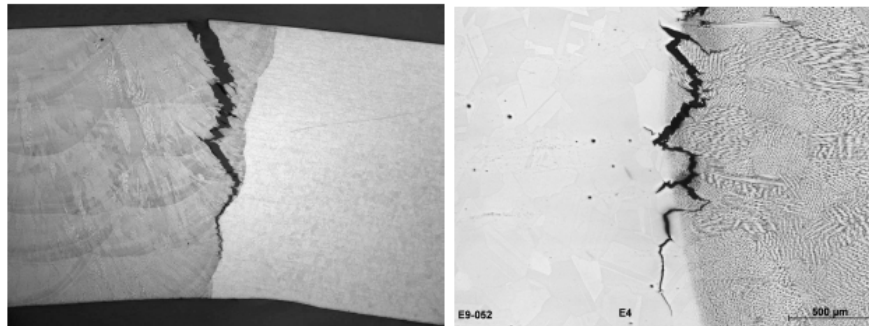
12Cr steel disc for welding test with LTES700R
